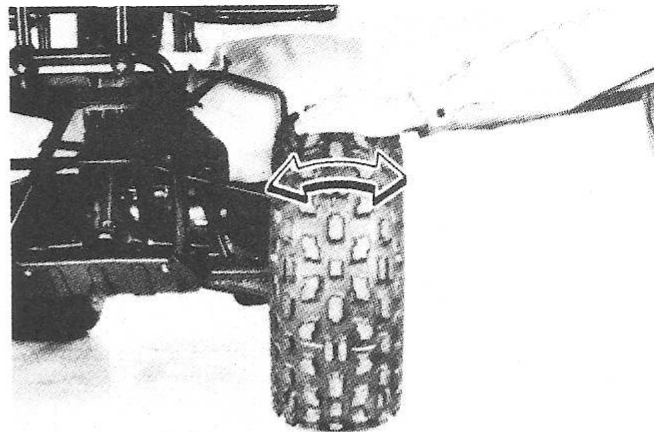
Checking the knuckle shafts for wear (Sec 40)
